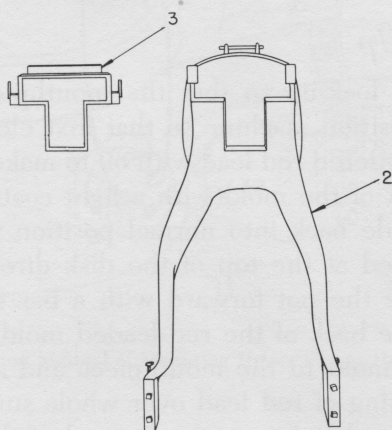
View of Pot Jacket and Lower Throat Heater Terminal Cover
